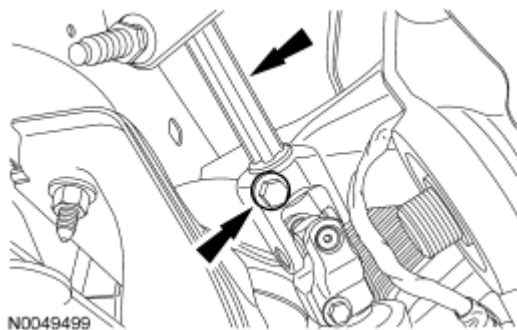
Locating Upper Bolt From Intermediate Steering Shaft
